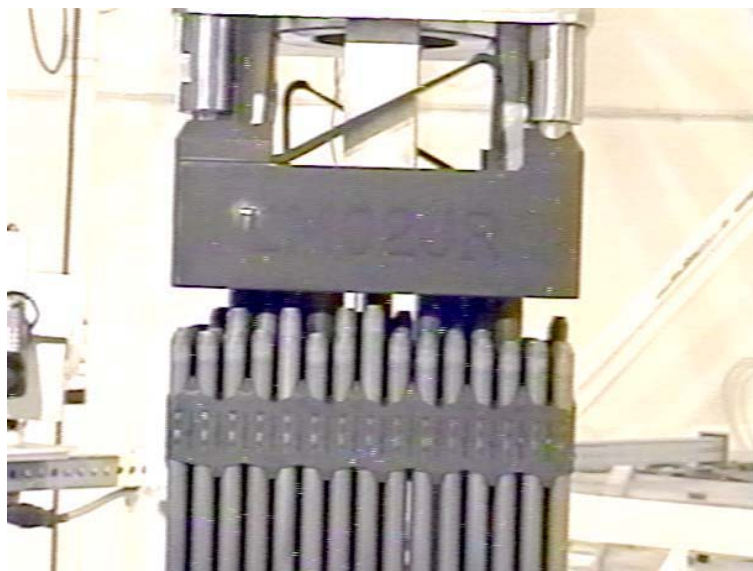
Visual Inspection of Assembly Chosen for Additional Testing (EPRI 2002)
